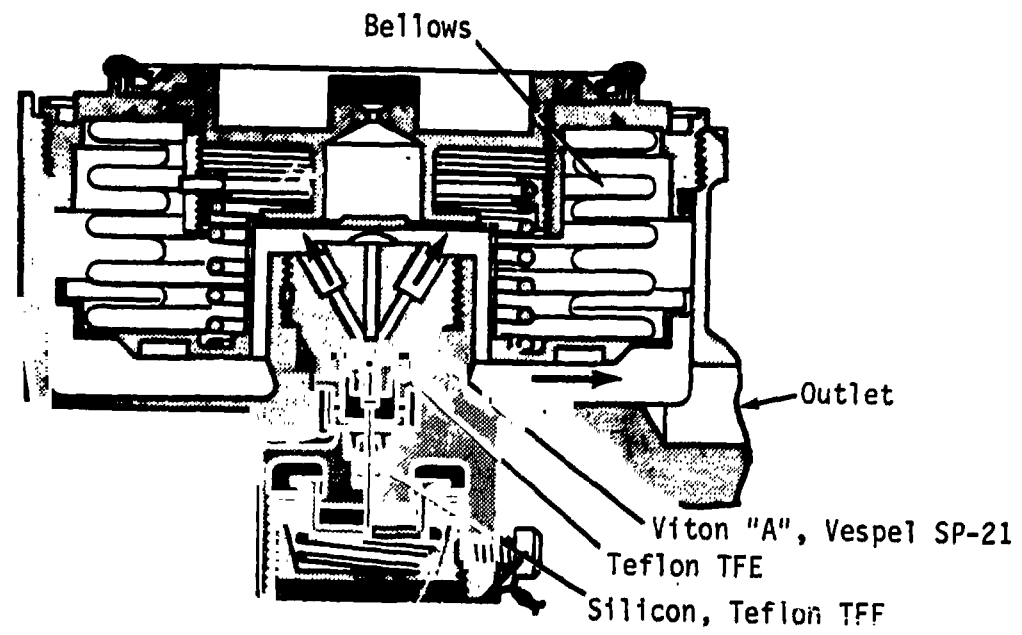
OPS Oxygen Regulator Assembly - Cutaway View.
